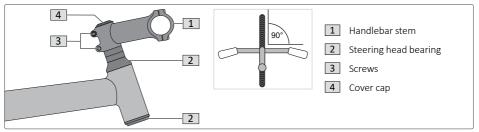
Adjusting the handlebar stem (clamp with clamp screw)
